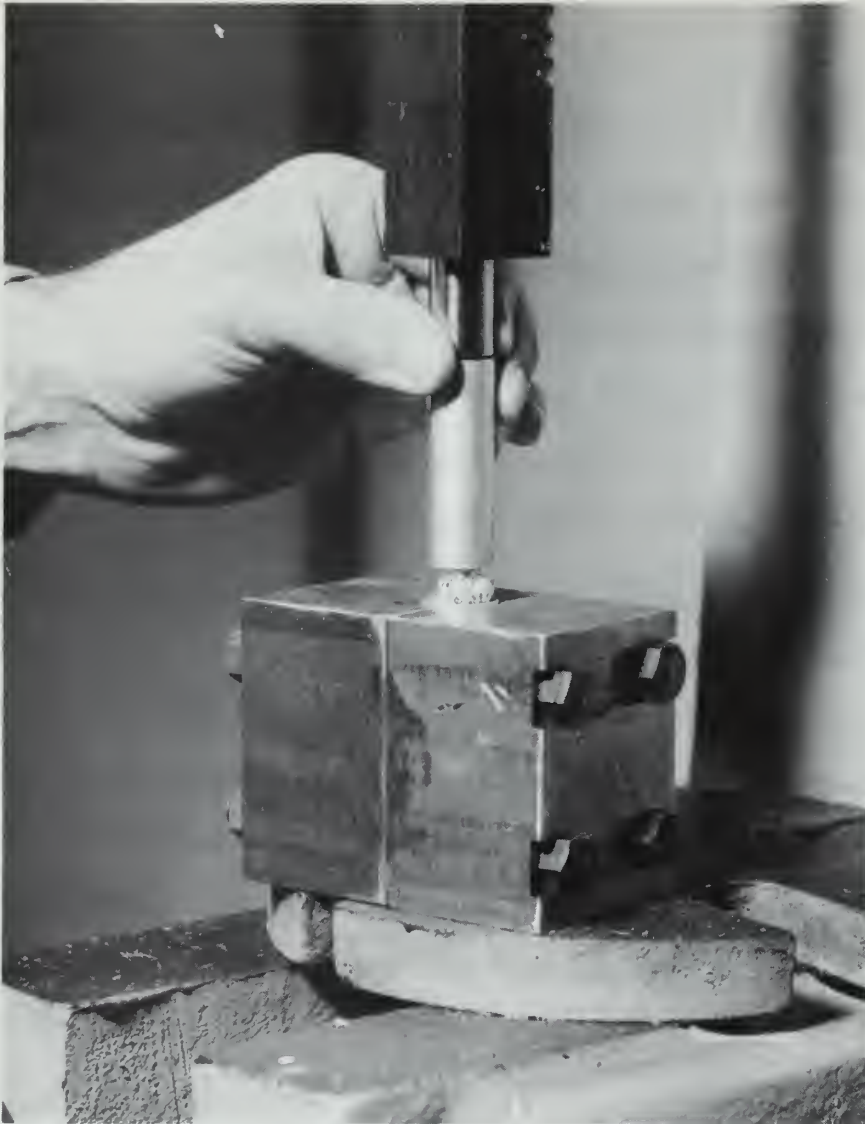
The actual packing operation. Five tons of force is exerted packing the powder into a solid. The excess plug top is cut off, the can is removed from the die, and the top is welded.
